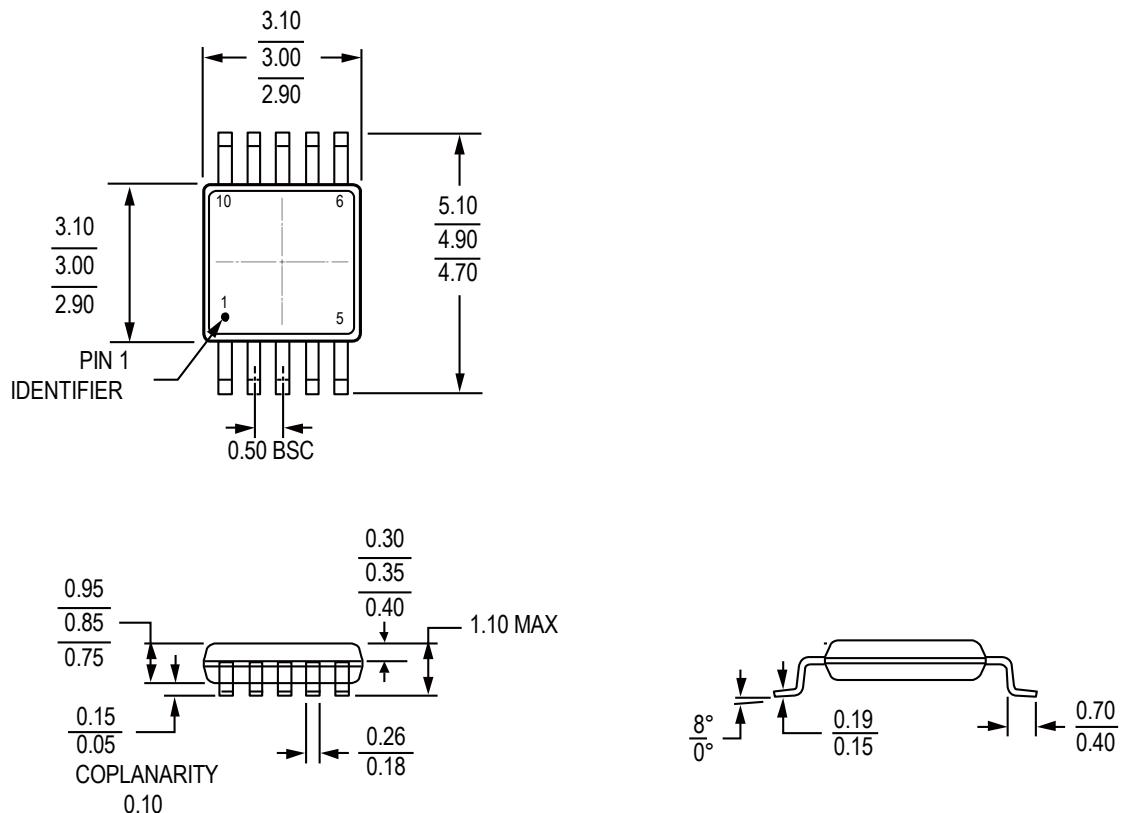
10-Lead MSOP Package Dimensions shown in millimeter
